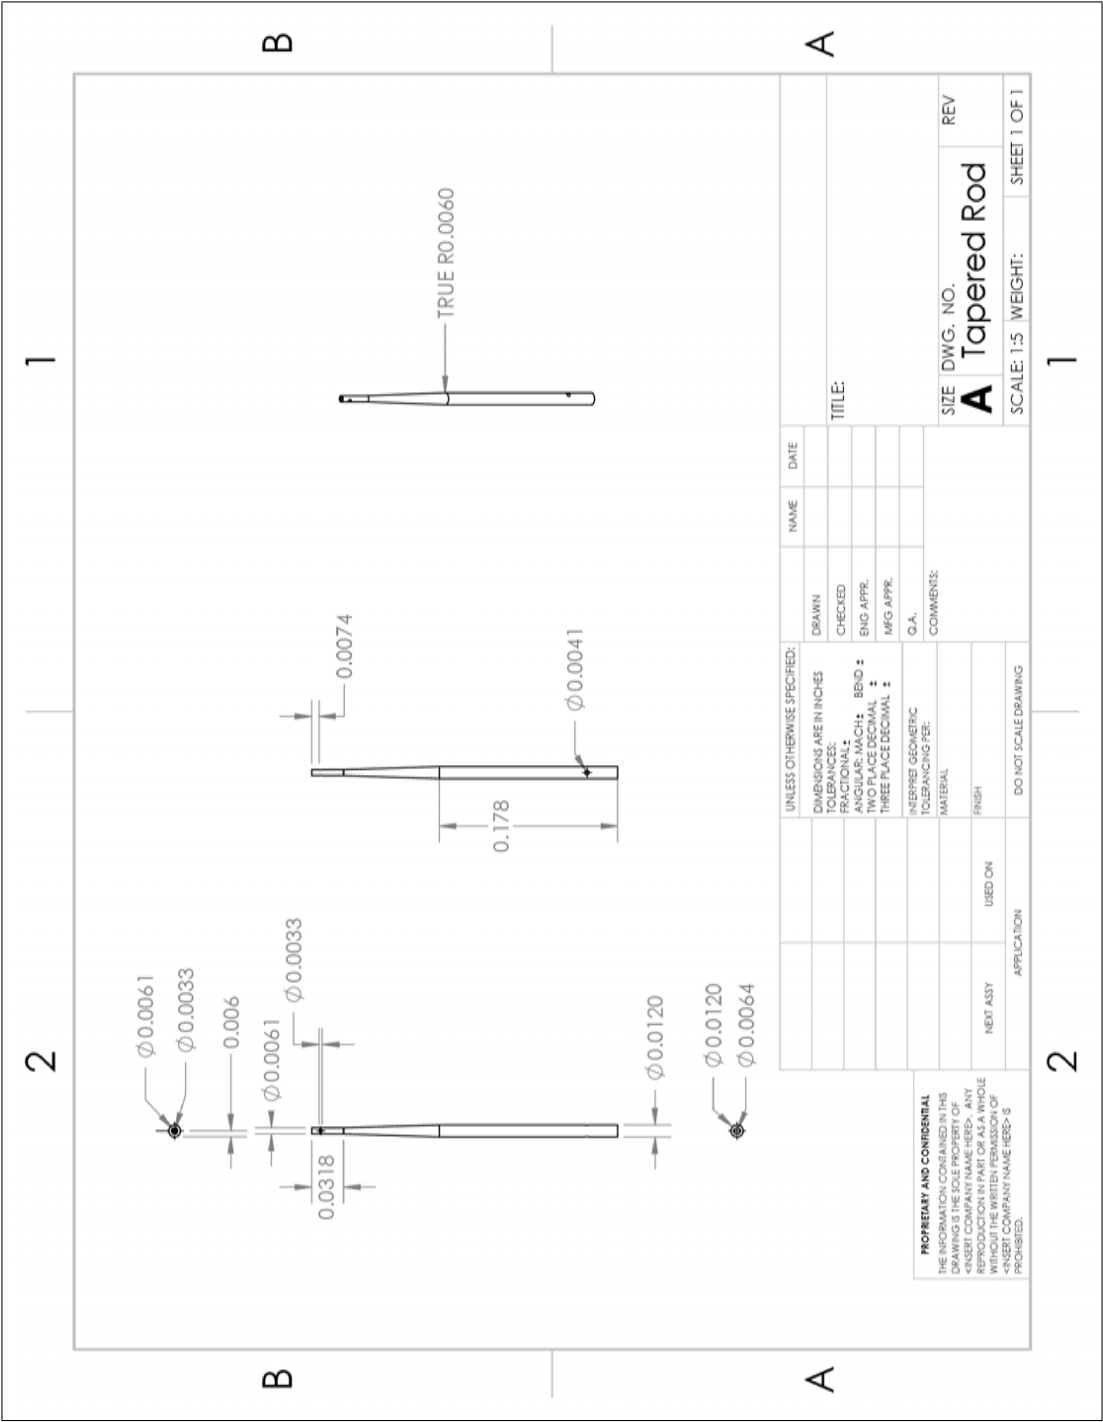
Drawing of Tapered Rod for vertical rod and linear motor
